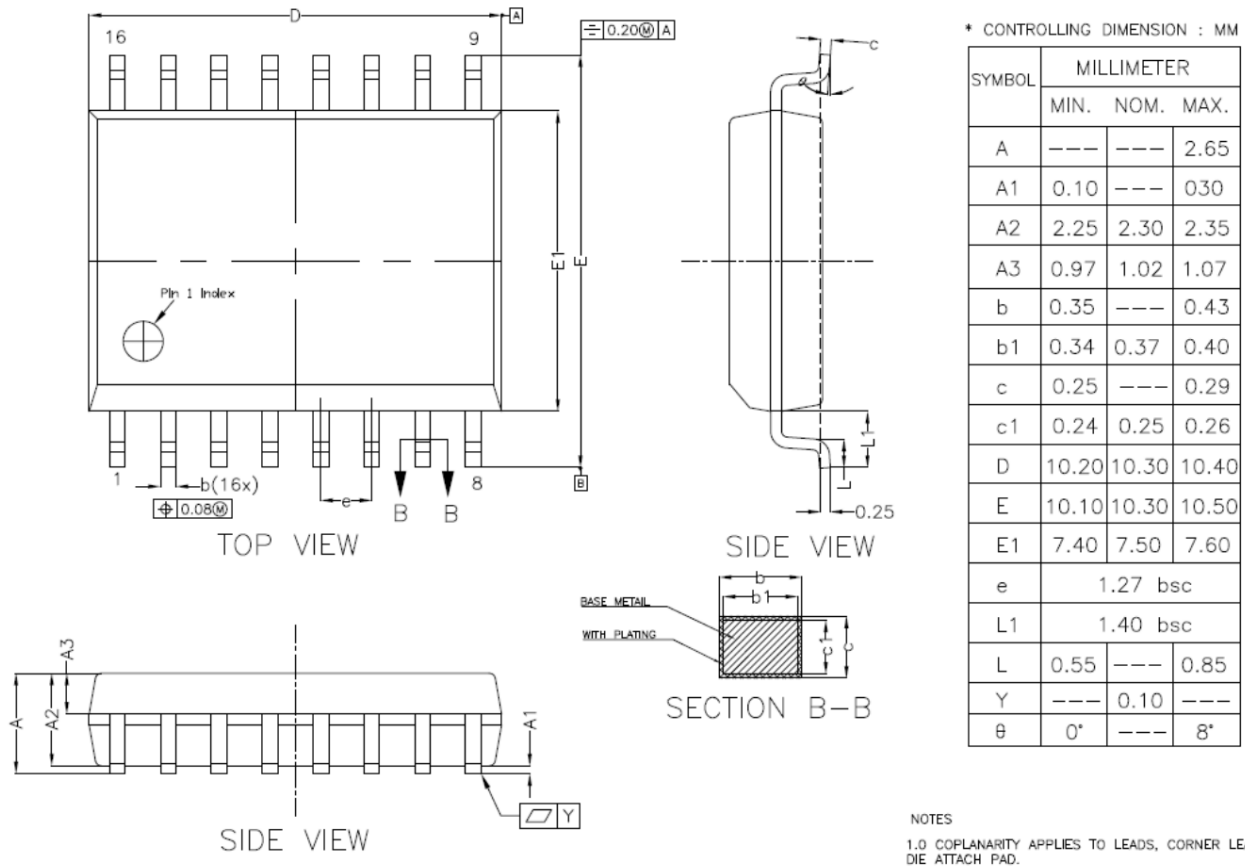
SOIC16 Package Shape and Dimension in millimeters (inches)
